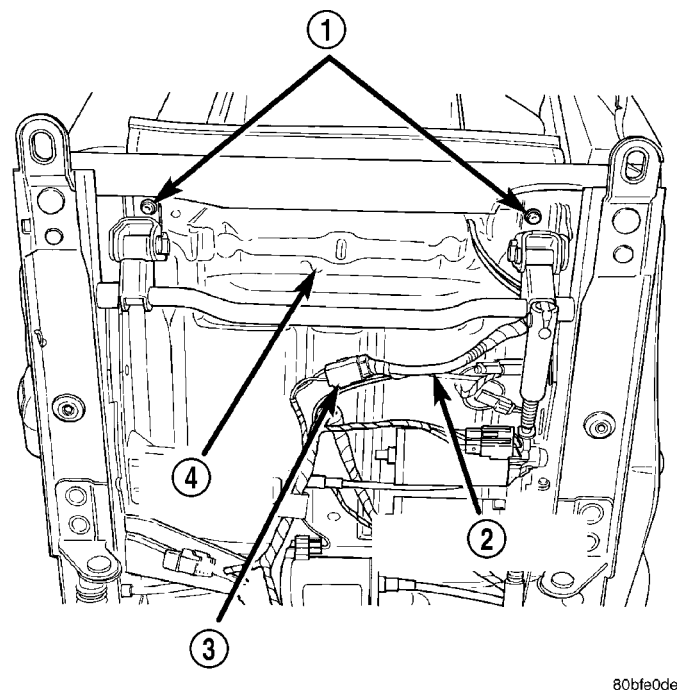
SEAT AIRBAG WIRE HARNESS LOCATION
